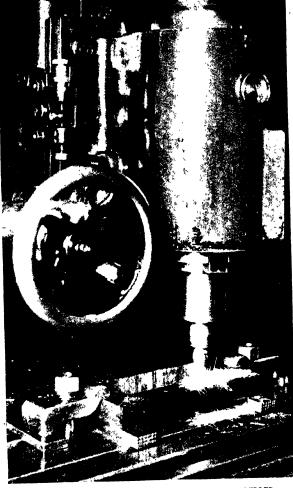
ROUTING OUT A DIE ON A VERTICAL MILLER Using two-lipped fast helical end mill on Brown & Sharpe machine. (Buck & Hickman, Ltd.)
